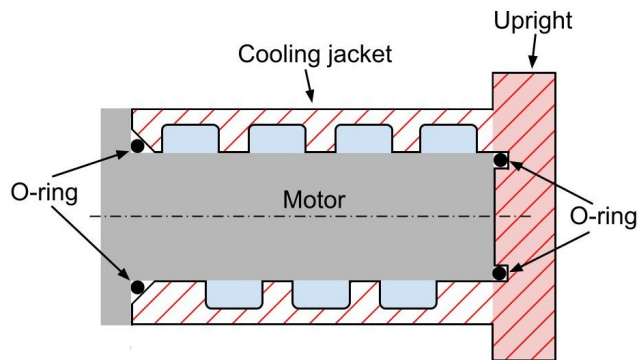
Placement of the two o-rings that prevent leakage from the cooling jacket.
